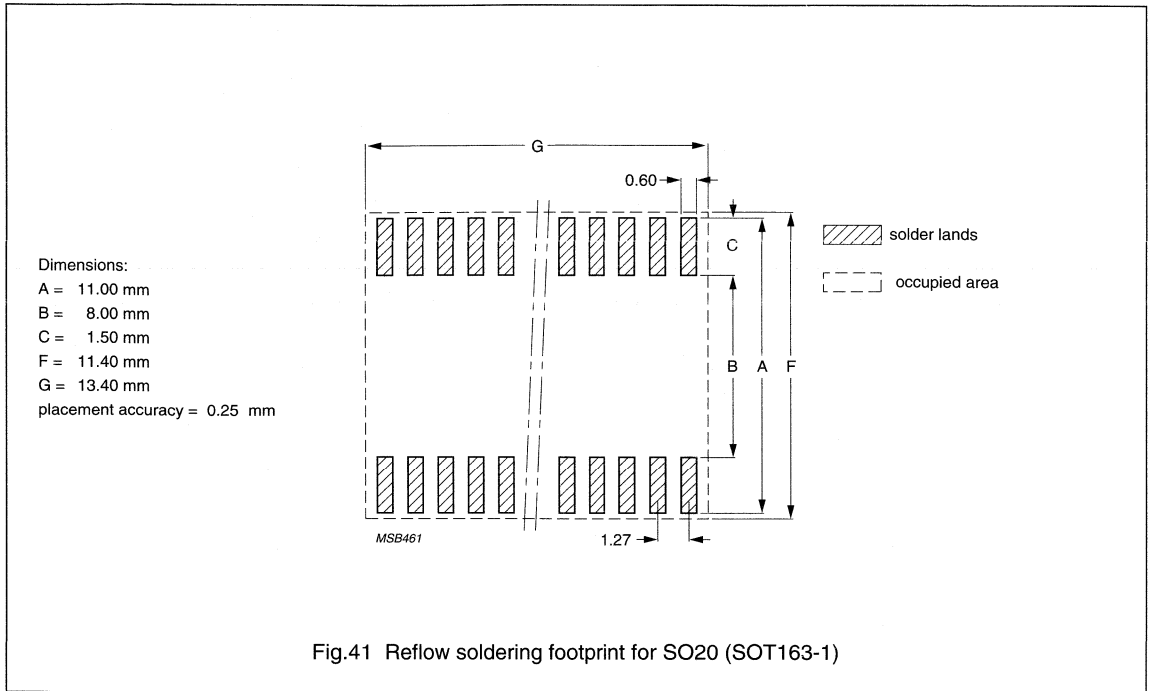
Reflow soldering footprint for SO20 (SOT163-1)
